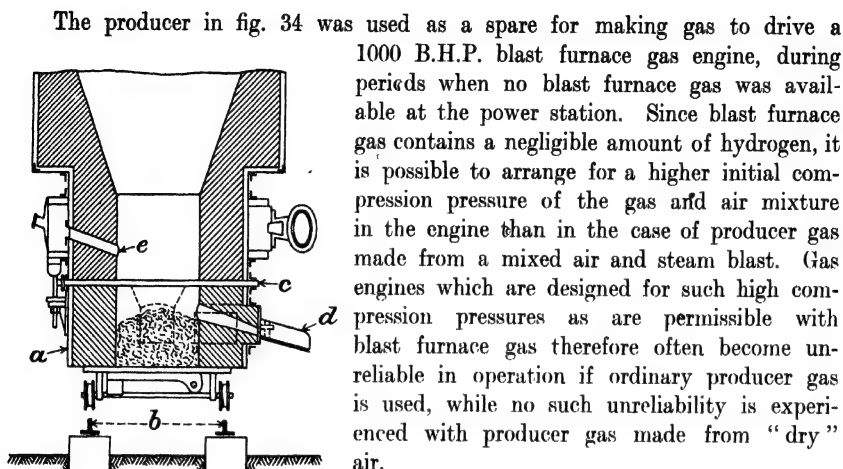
PINTSCH LIQUID SLAG PRODUCERS WITH REMOVABLE BASE.
